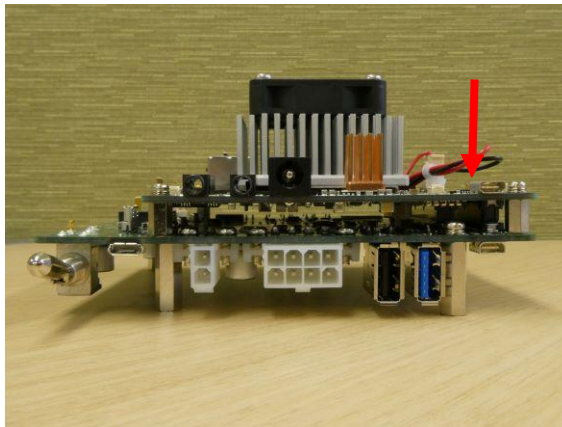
make sure that the counter sinking are on the bottom plate side
